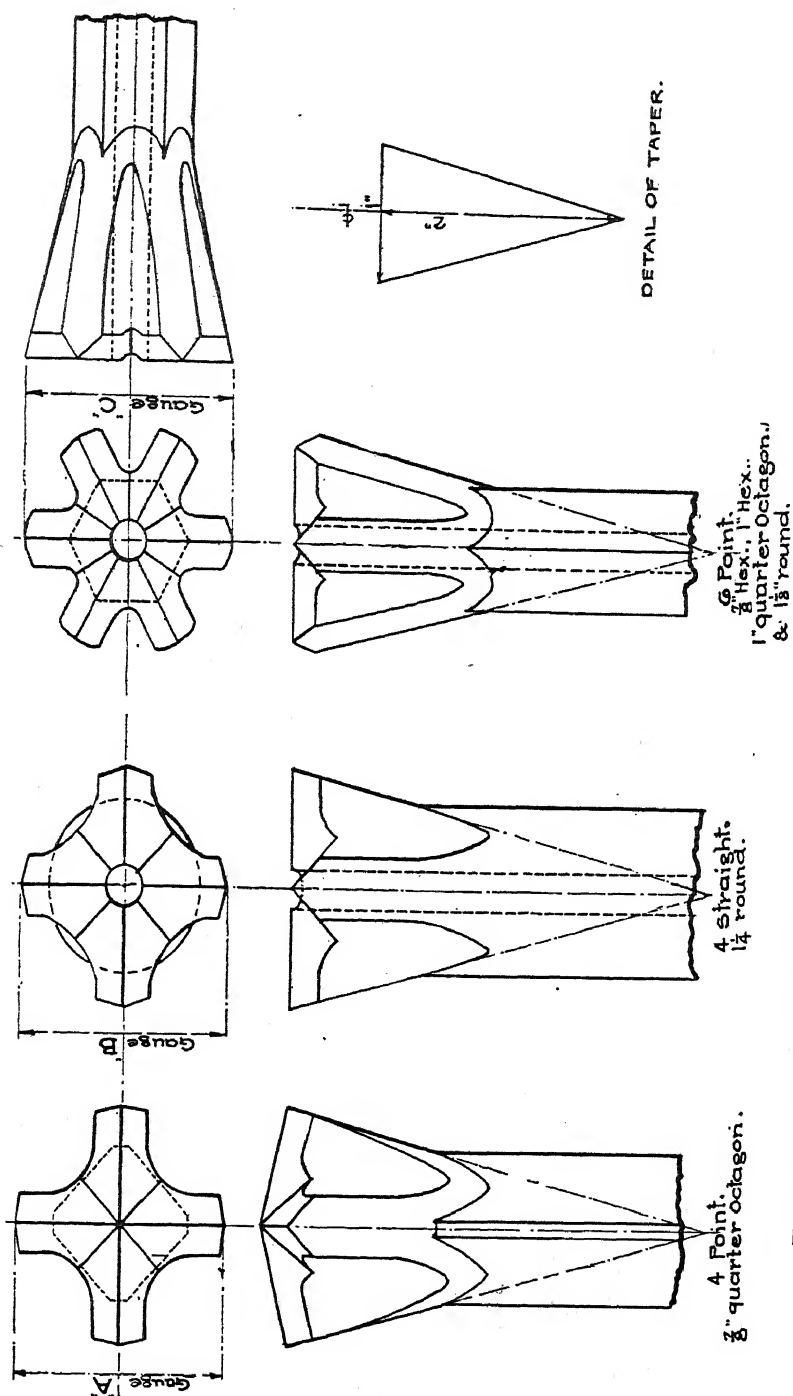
TYPES OF DRILL BITS USED AT FRANKLIN MINES OF THE NEW JERSEY ZINC CO.
